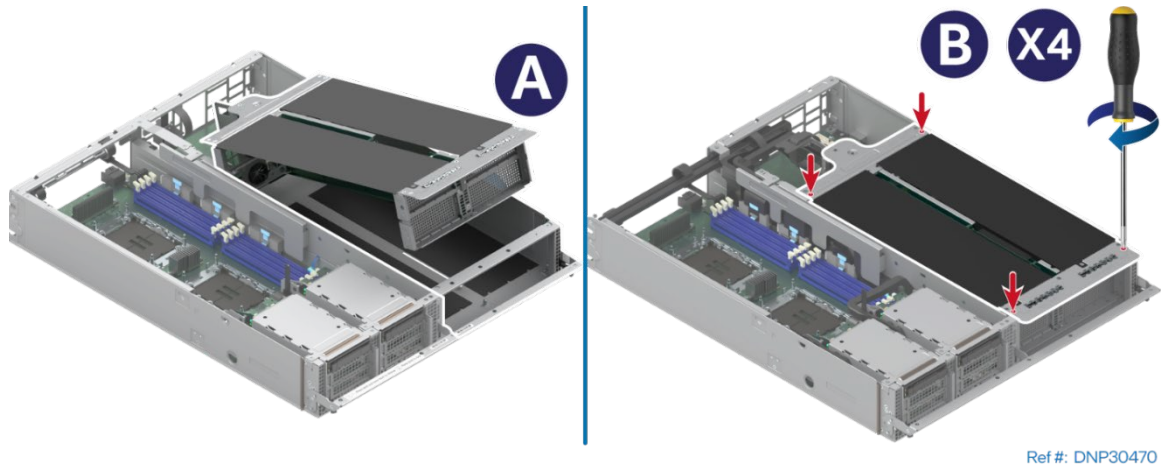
Installing the PCIe* Accelerator Module Riser Assembly
